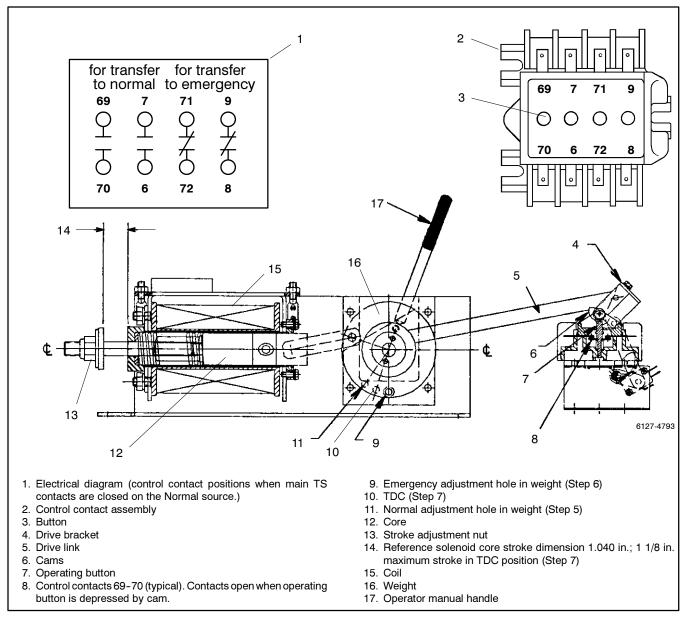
TS Control Contact Arrangement Below Solenoid Operator
